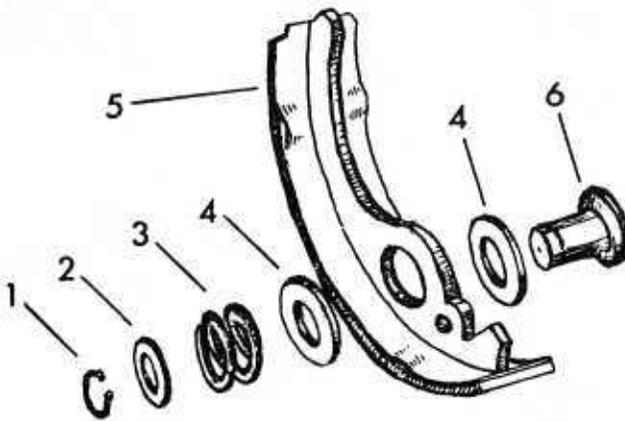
View of a brake shoe (front or rear) with the parts of the self-adjusting mechanism removed.
